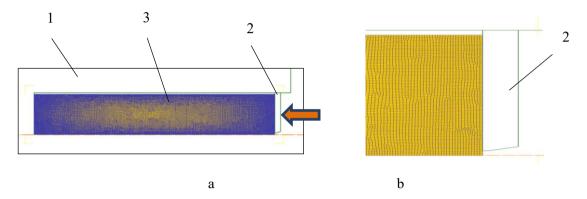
The design process scheme (a) and an enlarged image of the metal part adjacent to the matrix matrix extrusion die with the the finite element mesh display: 1-the wall of the container; 2-the matrix extrusion die; 3-the workpiece; the arrow shows the the matrix extrusion die movement direction
